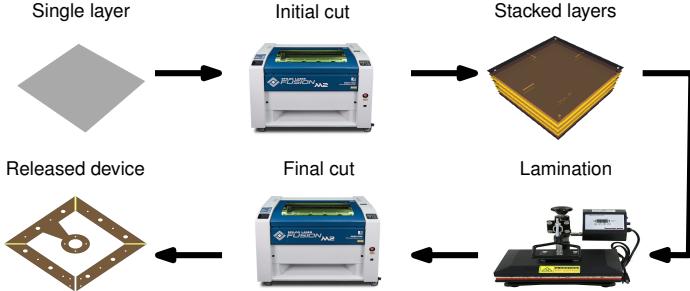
Procedure of making a laminated device using Pop-upCAD as design program and heat press and laser cutter as machinery.
